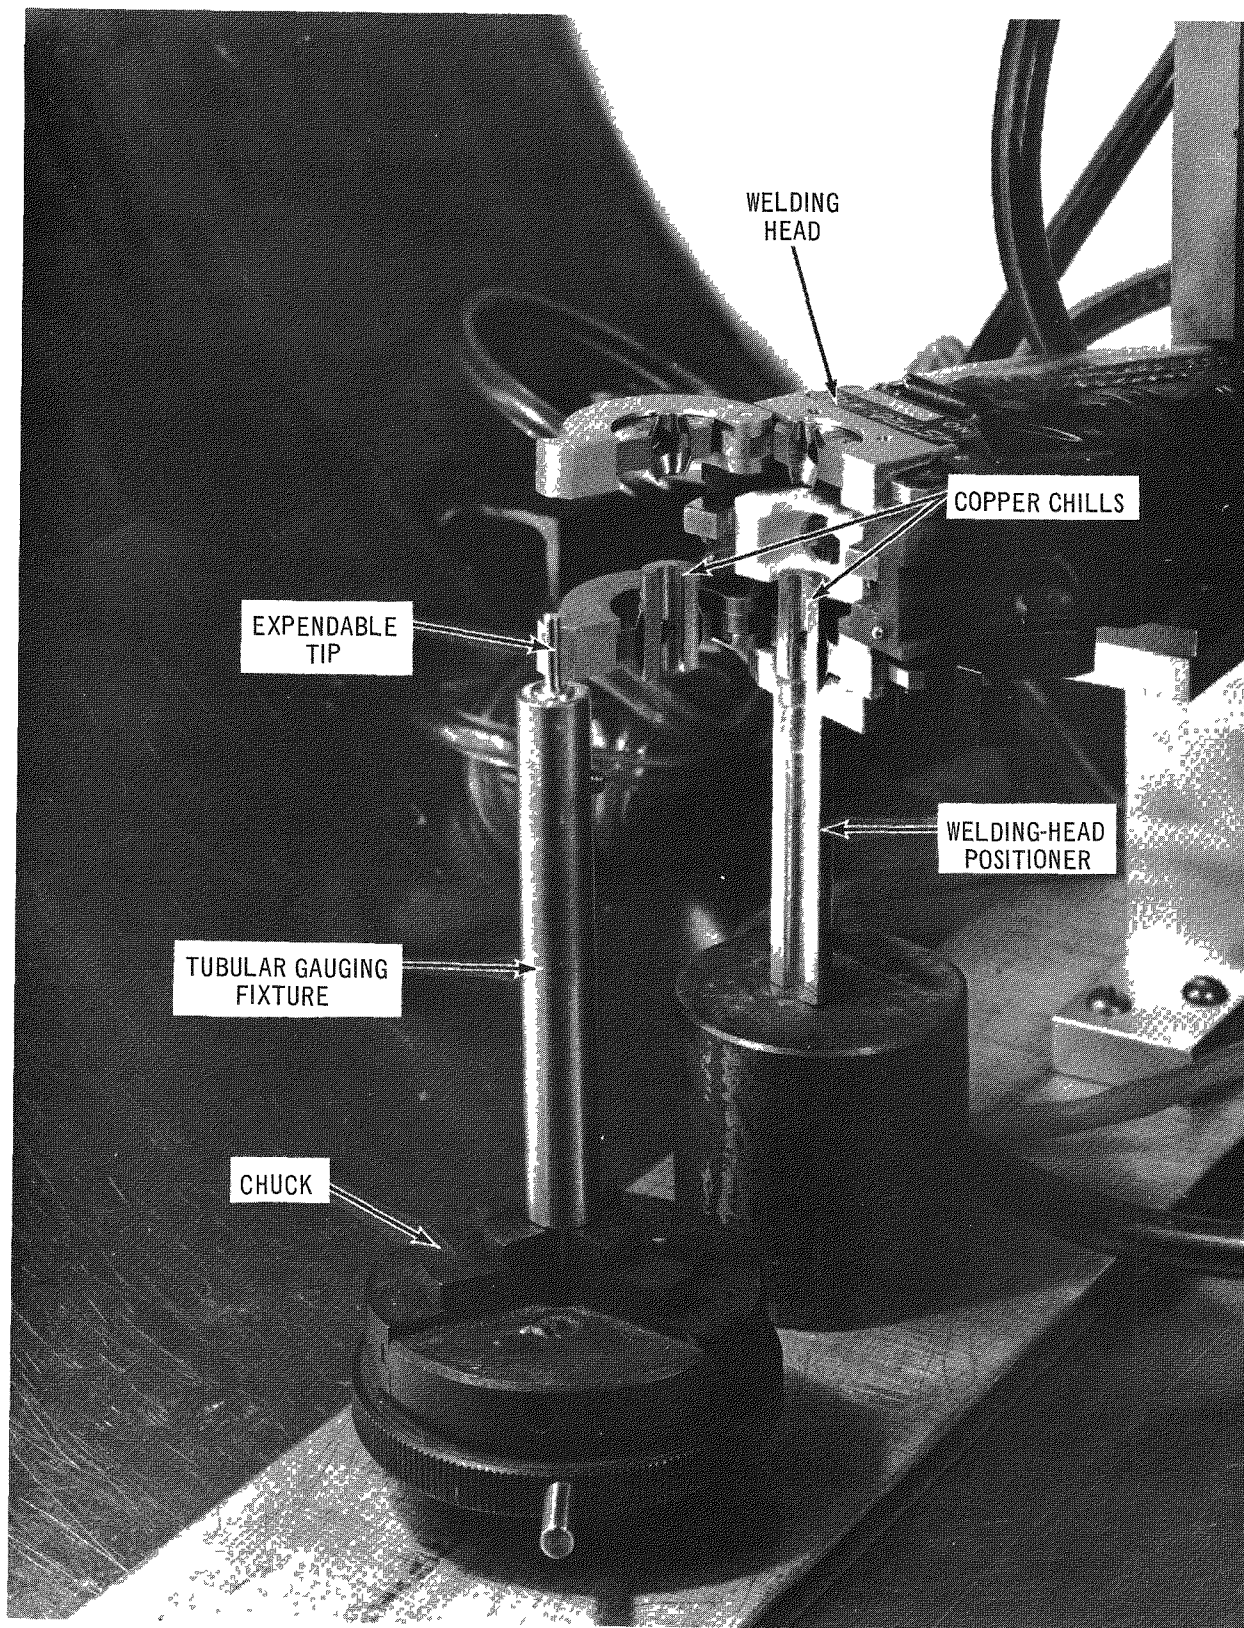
Fuel-element Preassembly and Surrounding Gauging Fixture Placed in Three-way Chuck (Foreground) in Welding Chamber. ANL Neg. No. 104-77-100.
